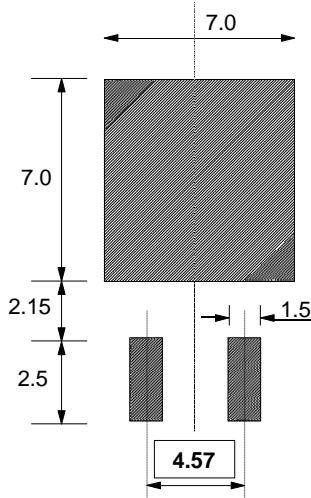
SOT428 : minimum pad sizes for surface mounting.
